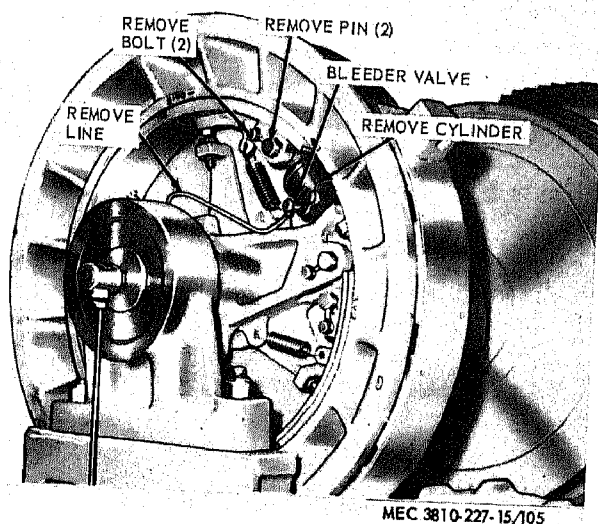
Hoist drum shaft clutch hydraulic cylinder, removal and installation.
